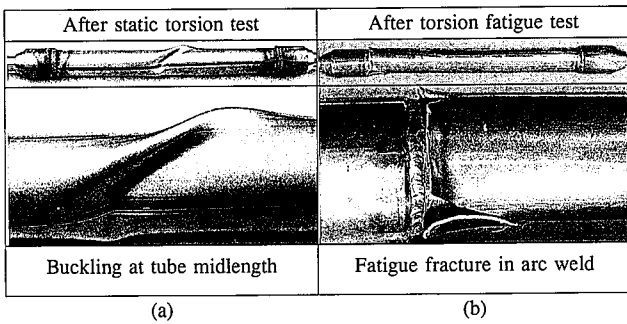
Appearance of sample tubes after torsion test (75.0 mm ϕ \times 1.6 mm t)
